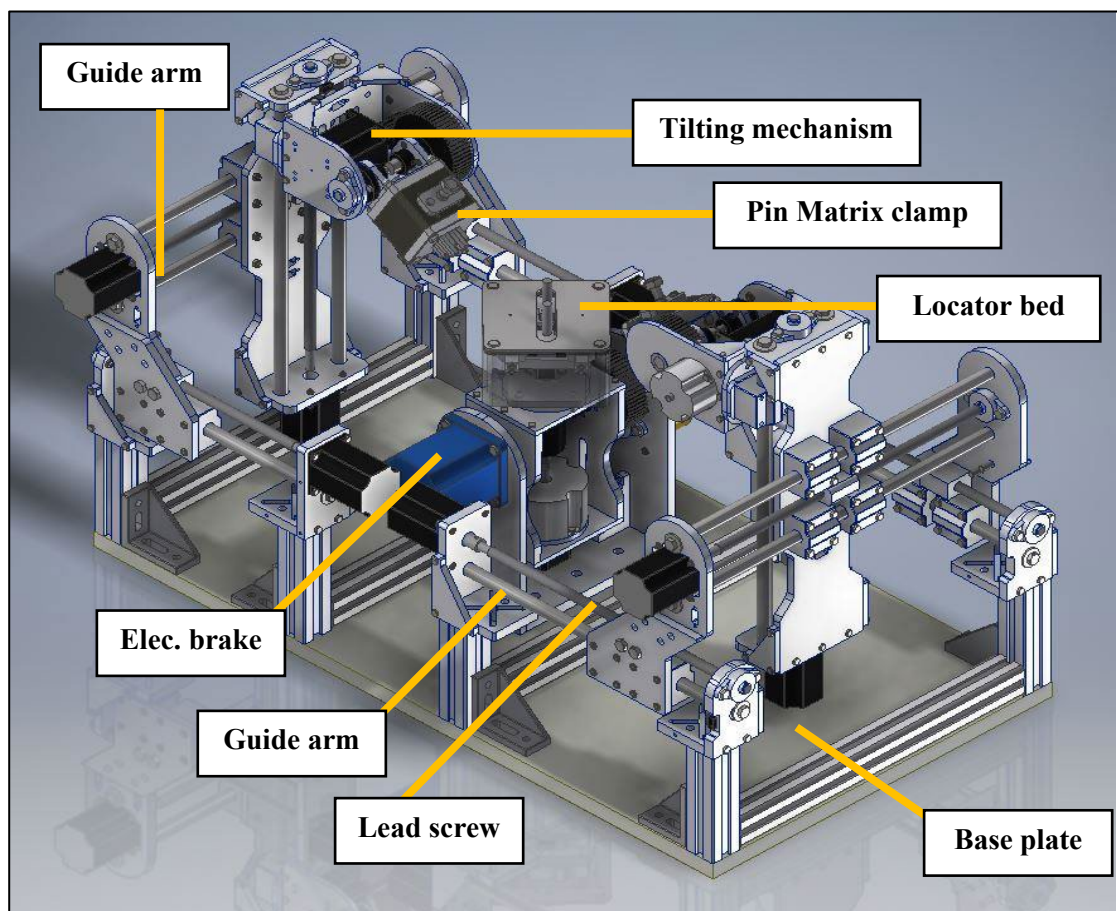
CAD model of the Automated Flexible Fixture System components with components labelled
